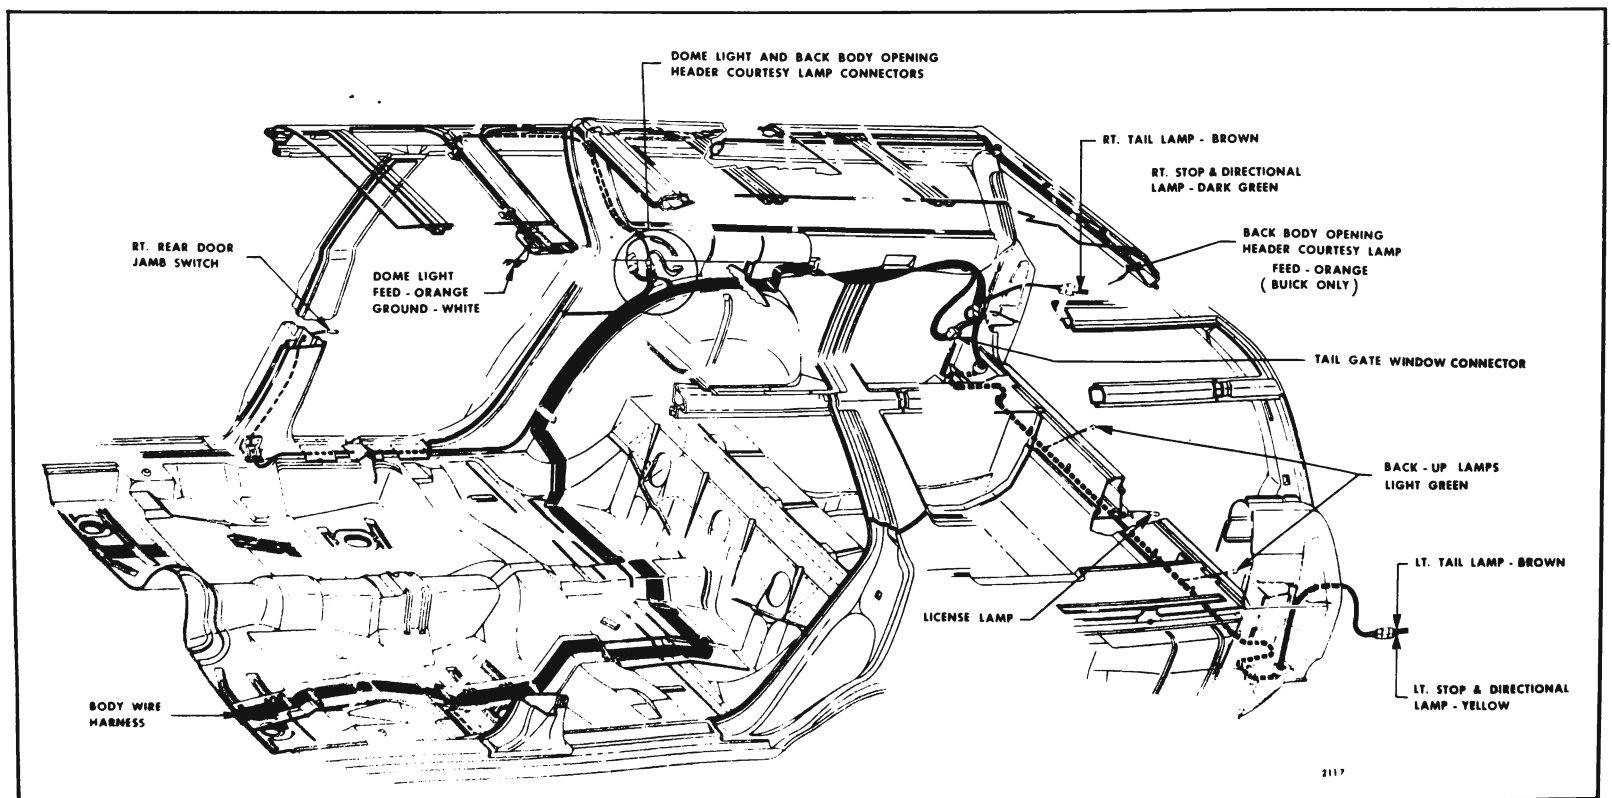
Right Side and Rear Wiring - Buick "A" Body 55-65 Style
